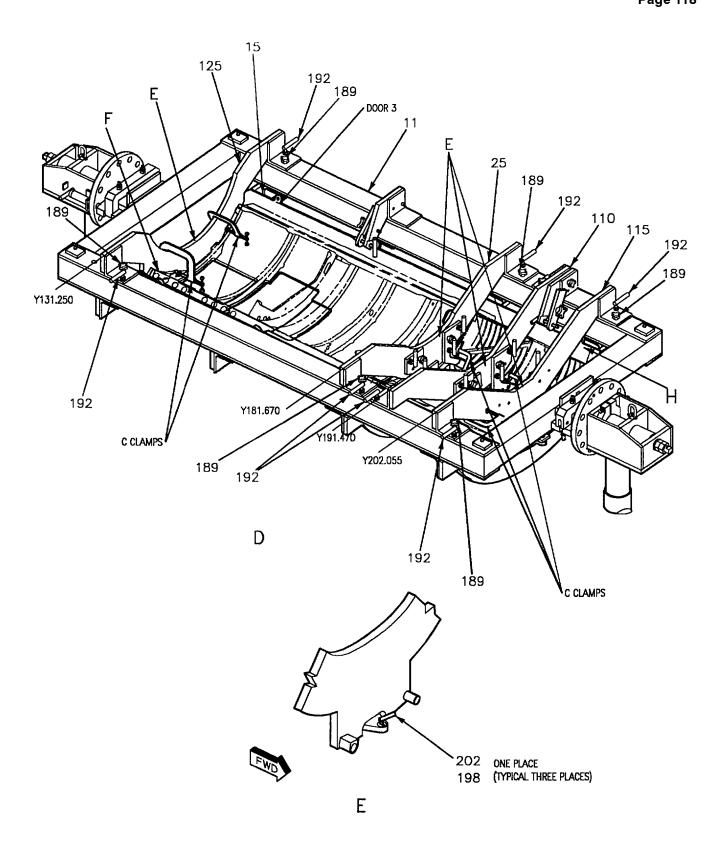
Replacement - 74A313055 Skins (Sheet 3)
